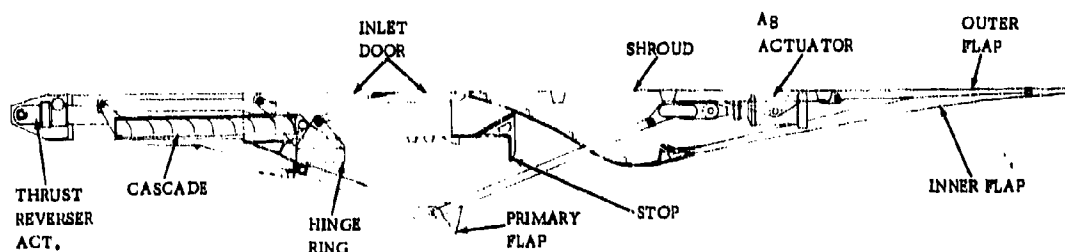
GE4 EXHAUST NOZZLE AND THRUST REVERSER
